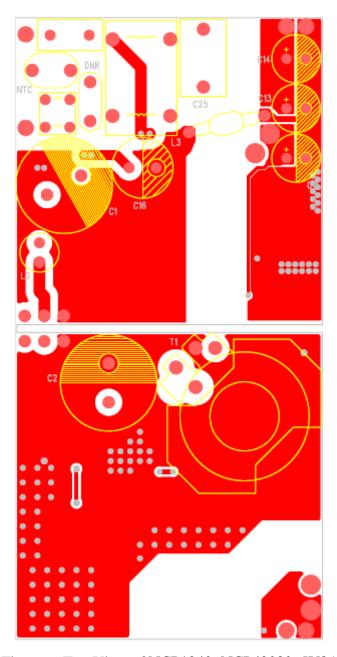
, Top View of NCP1340+NCP43080_5V8A's PCB
